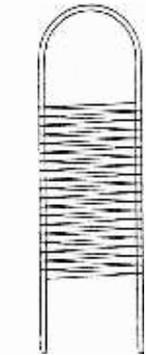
View of a grid for a DE 5 valve as taken from the machine of Fig. 1.
